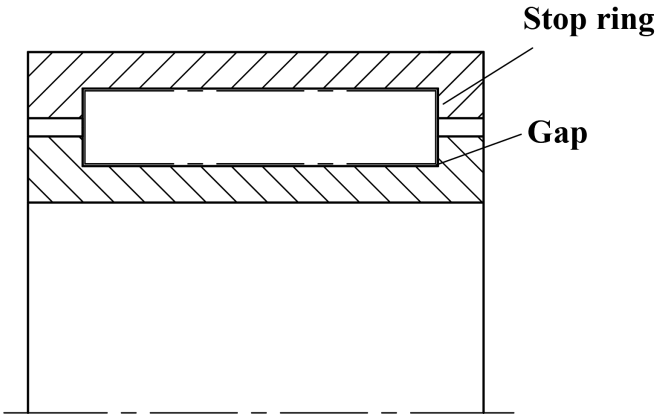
Ready-to-install needle bearing comprising an inner and outer ring US2009074344A1.
